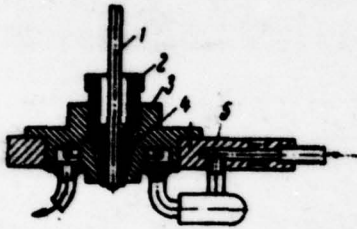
Rigid fastening of rod heater [6-32]. 1 - heater; 2 - clamp nut; 3 - housing of current input; 4 - sectional insert/bushing; 5 - flange of current input.
